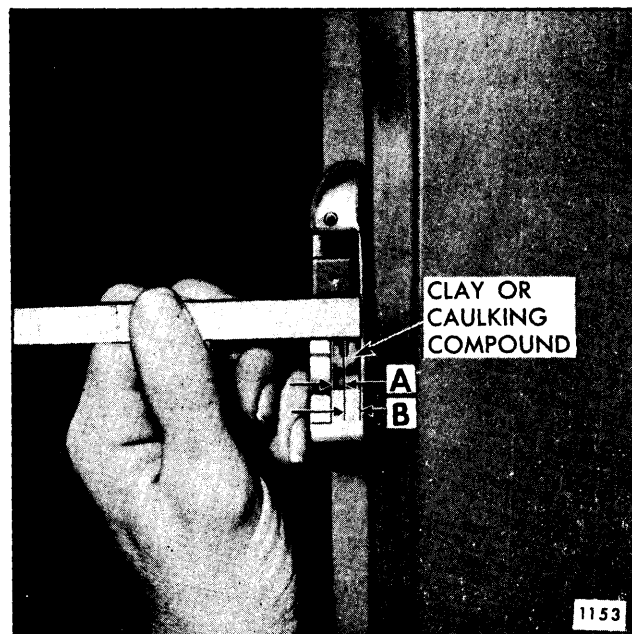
Tail Gate Lock Striker Caulking Check
